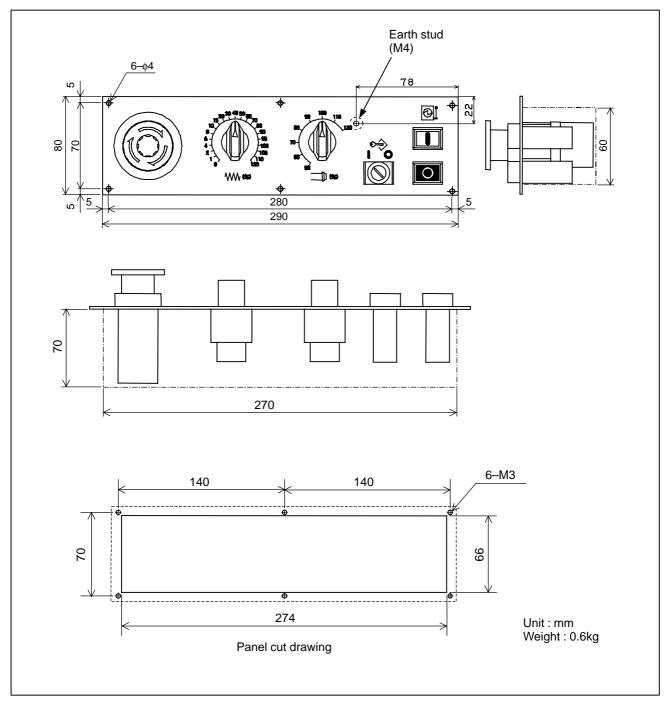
Machine operator's panel (Sub panel A) Specification No. : A02B-0236-C232
